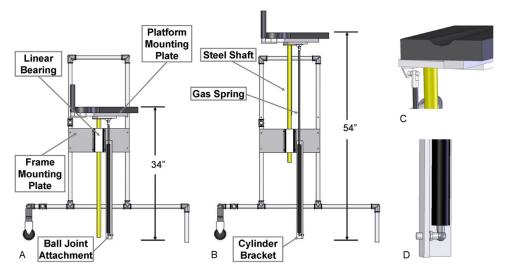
Pneumatic elevator components. The gas springs actuate the assembly. (a) The platform sits 34 inches from the ground in the fully compressed position. (b) In the fully extended position, the platform height is 54 inches. (c) Clevis-pin rod end attachment of gas spring to walker platform. (d) Ball-joint rod end attachment of gas spring cylinder to mounting bracket.
